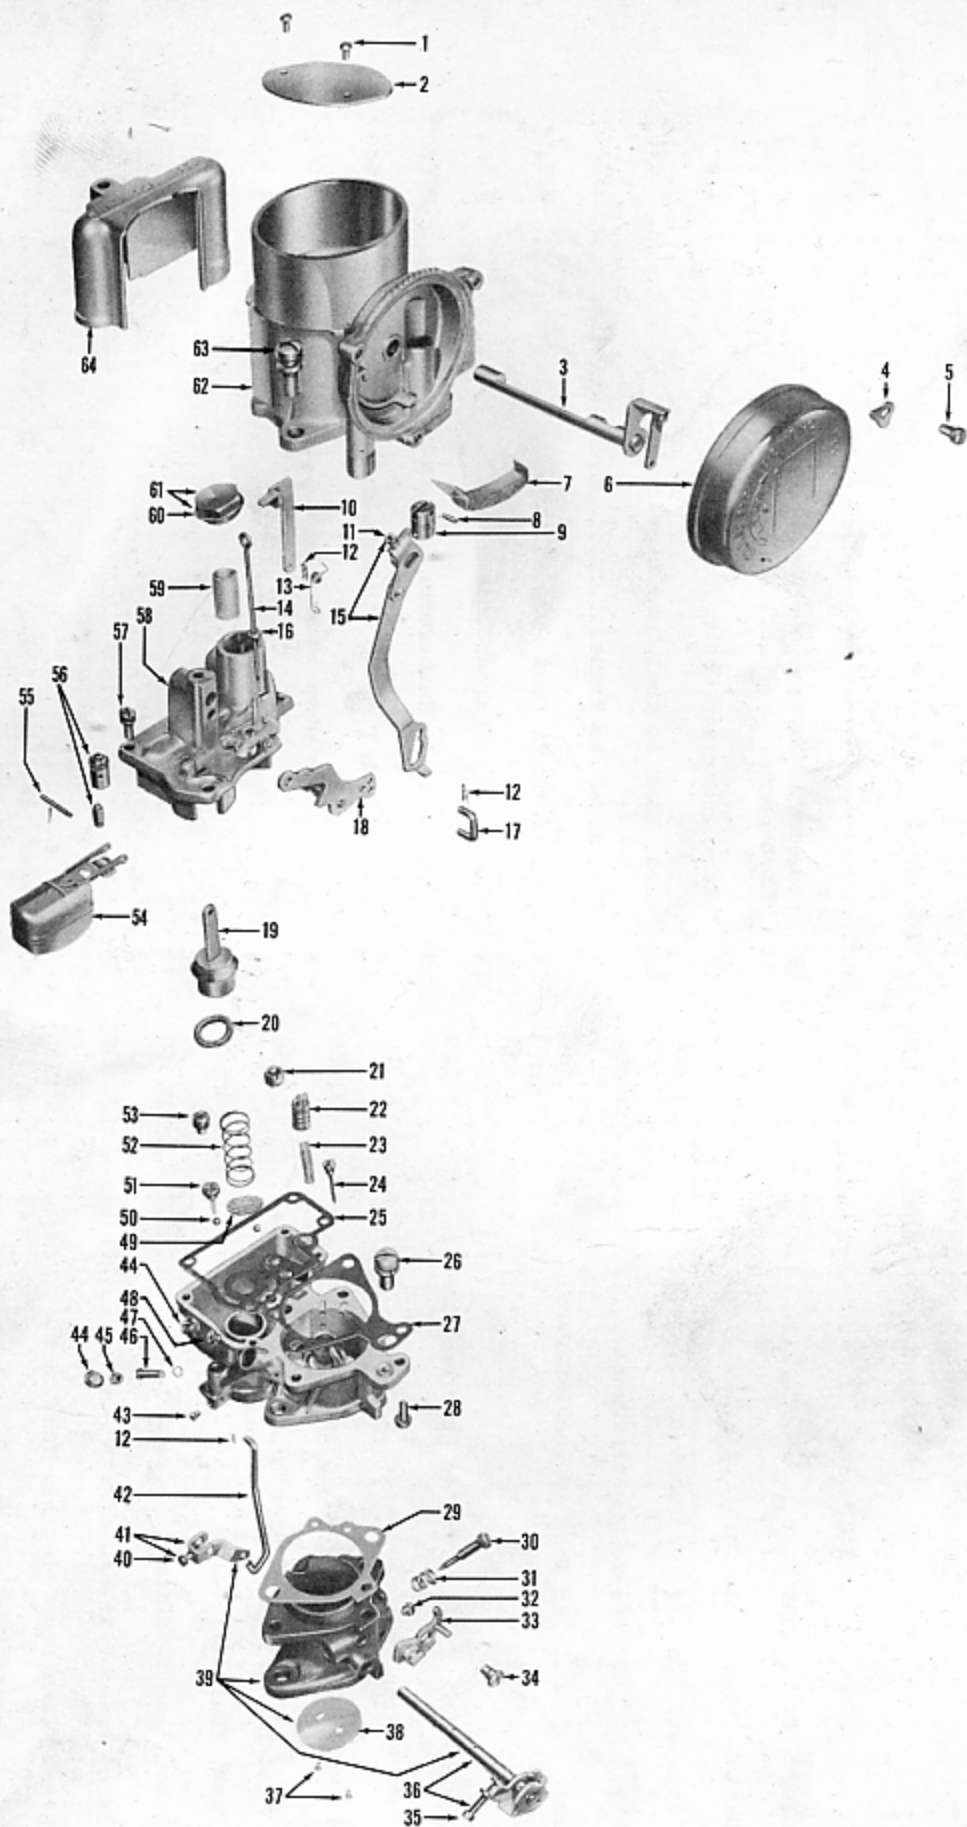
CARBURETOR, CARTER MODEL WA1-622SB, PART NO. 204108, SINGLE MANIFOLD ENGINES
